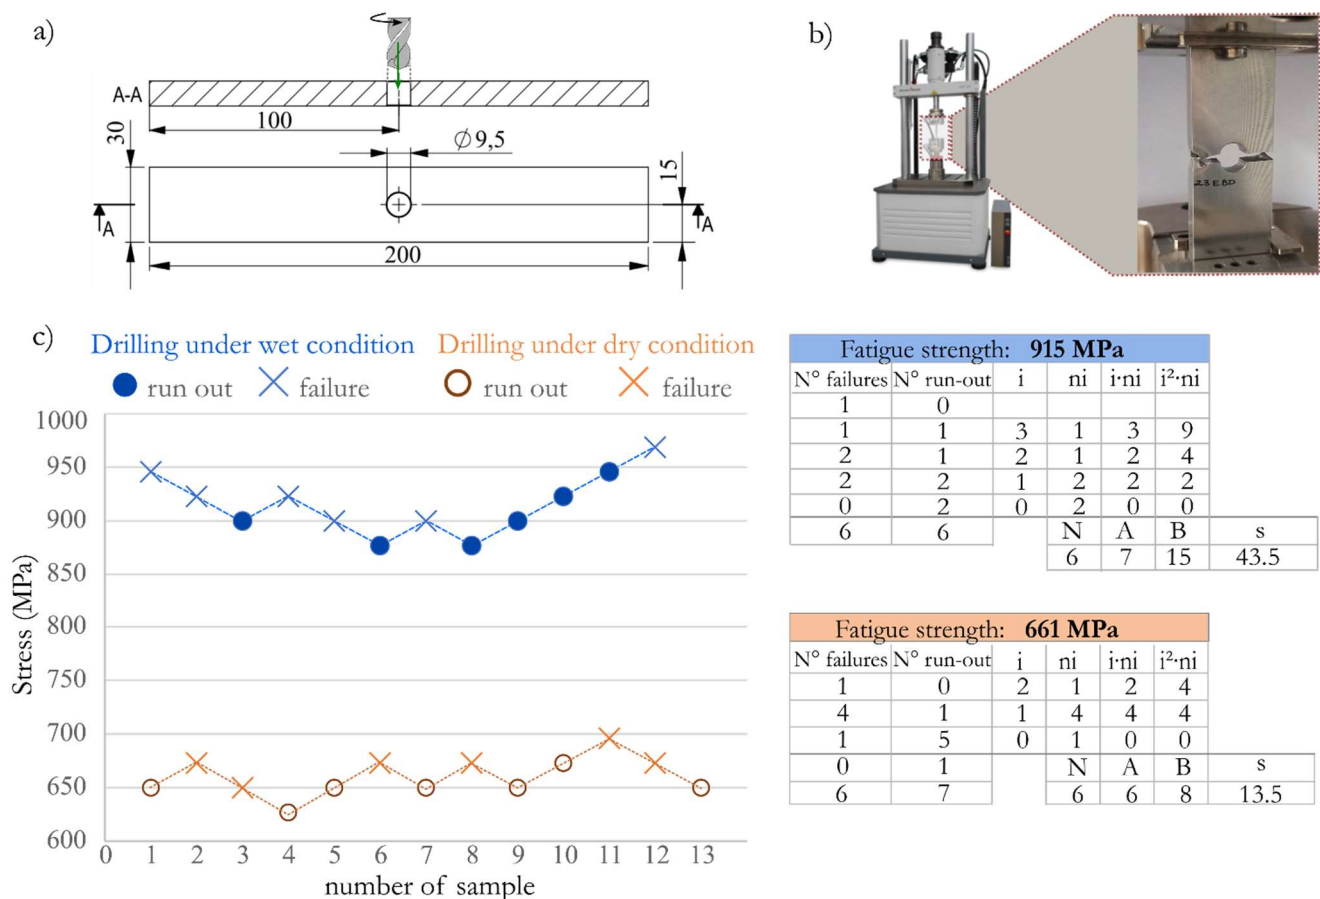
(a) Fatigue T-Type specimen geometry, adapted from the European Standard EN 6072:2010, $K_t = 2.35$, (b) Position of the sample in the fatigue machine, an example of a test that ended in part failure before reaching 1 million cycles (c) Fatigue test results following the staircase method for 1 million cycles
